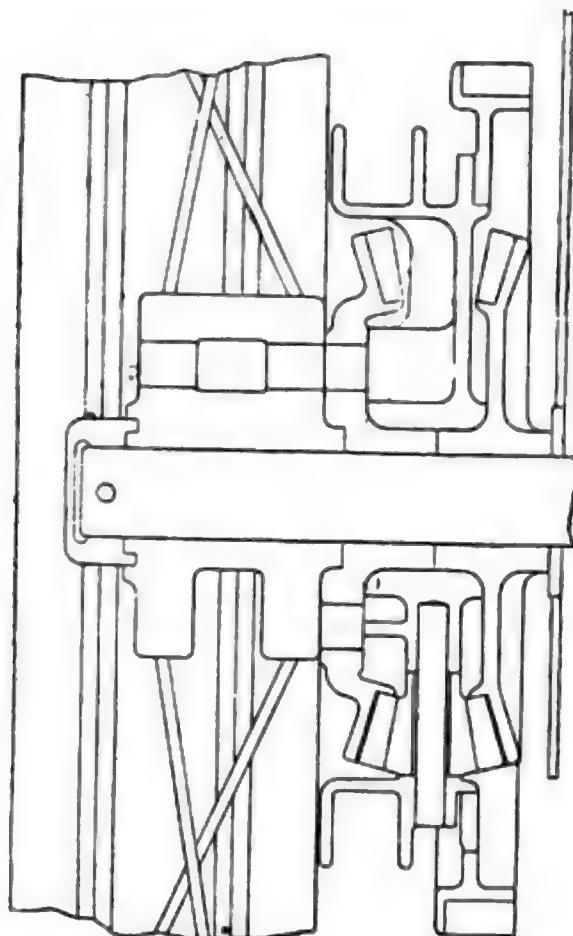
COMPENSATING GEAR AND WINDING DRUM
